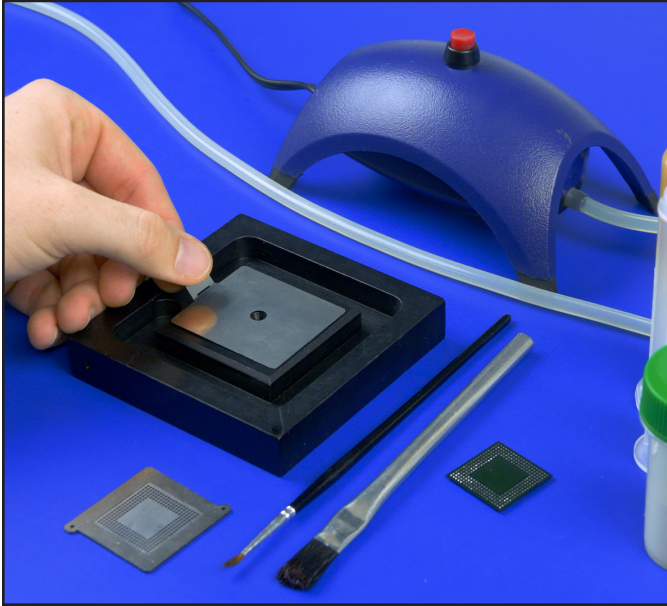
Placing the transfer plate on the vacuum fixture and aligning the holes
